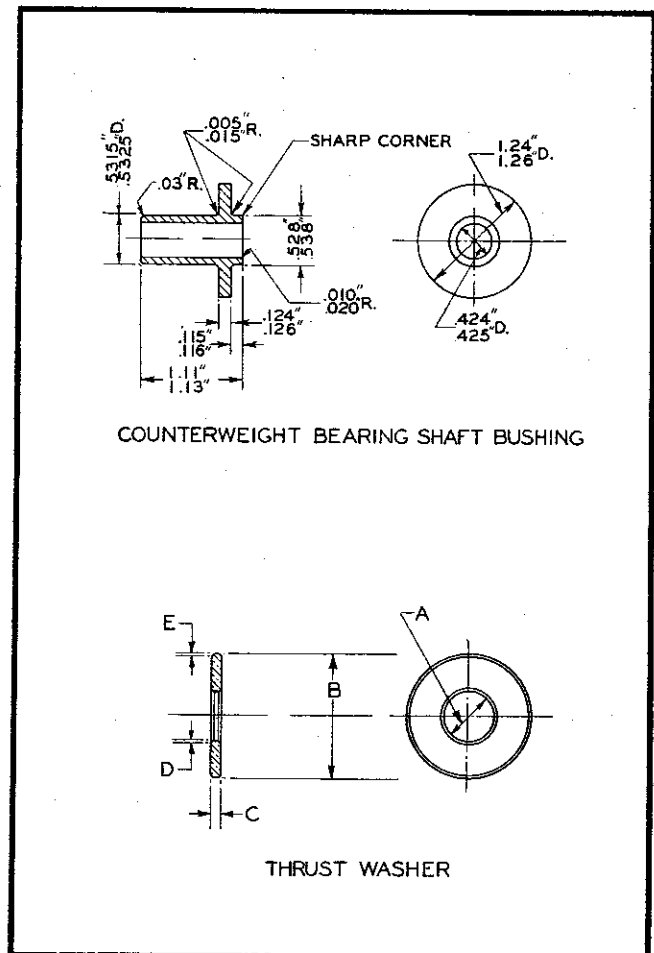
Counterweight Bearing Shaft Bushing and Thrust Washer
